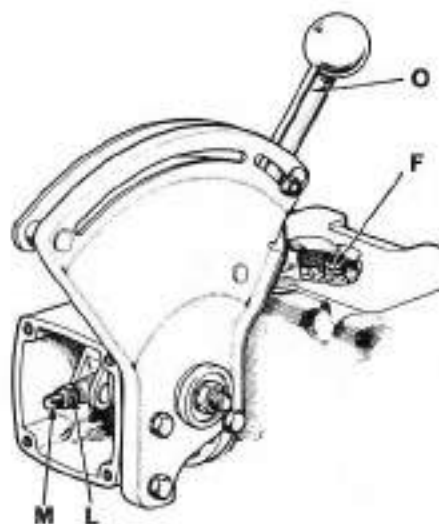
Adjusting points for connecting rod nut (L); refer to text for adjusting procedure.
